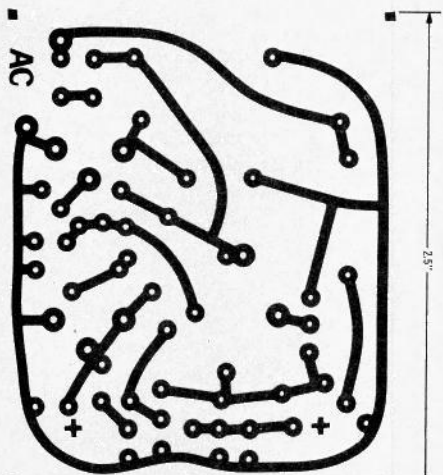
FOIL PATTERN of the line receiver PC board shown full size.
